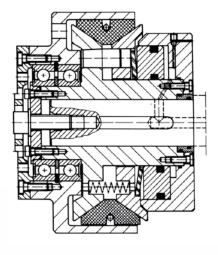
Conax® Friction clutch type CHFA hydraulically actuated for universal joint
